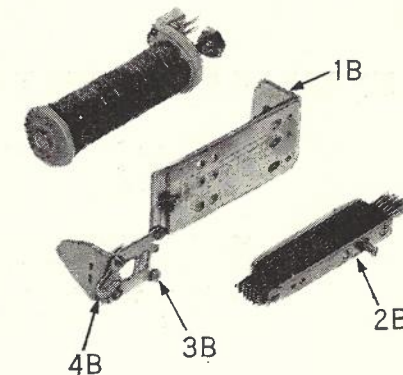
Old RAF Relay showing Single Hole Mounting (1B), Solid Springset Top Plate (2B), Springset Lifting Screws (3B), and "U" shaped armature Pressure Adjusting Tongue (4B).
